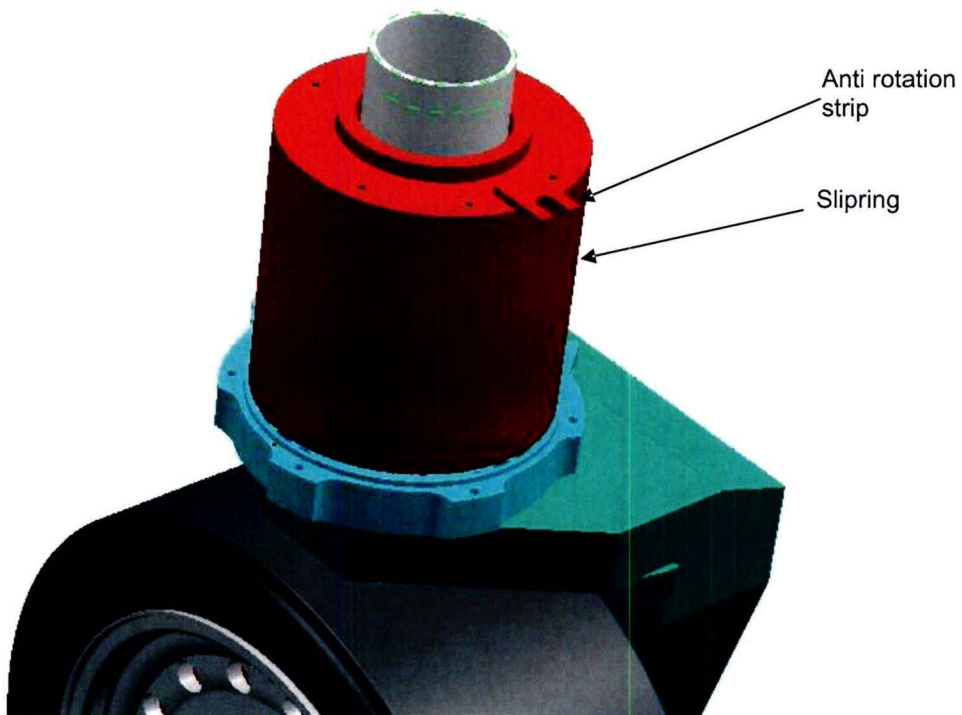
Slipring mounted to the inner tube of the wheel carrying arm
